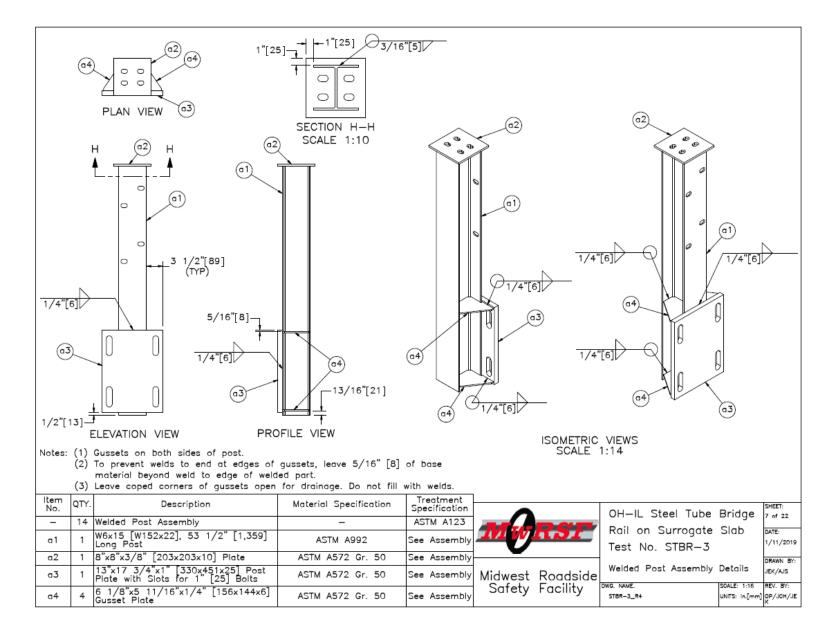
Welded Post Assembly Details, Test No. STBR-3
